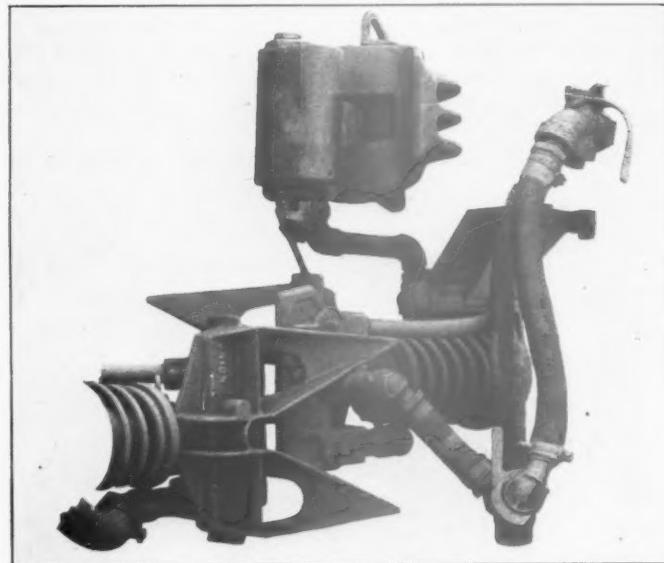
Coupling with One Connector 4½ in. Low and 3 in. Off Center
